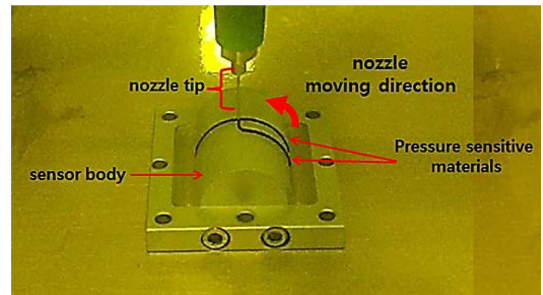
Photograph of dispensing of improved pressure sensitive material on the sensor body
